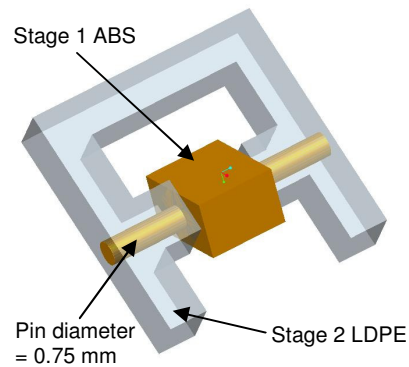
IN MOLD ASSEMBLED REVOLUTE JOINT.
